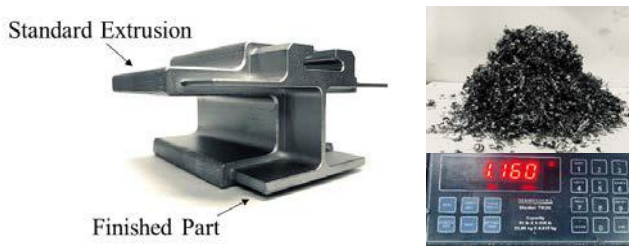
A finished part (20mm long) was machined out of a standard extrusion using the in-house equipment, that resulted in approximately 0.5kg of machined waste.
